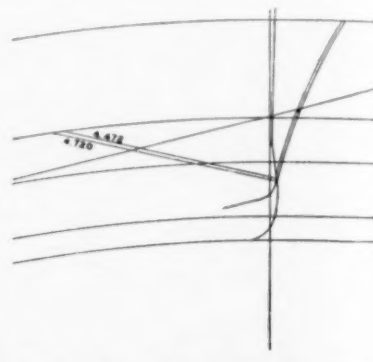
DIAGRAM OF 33-TOOTH, 20-DEG. ANGLE, 15-DEG. HOBBED GEAR
